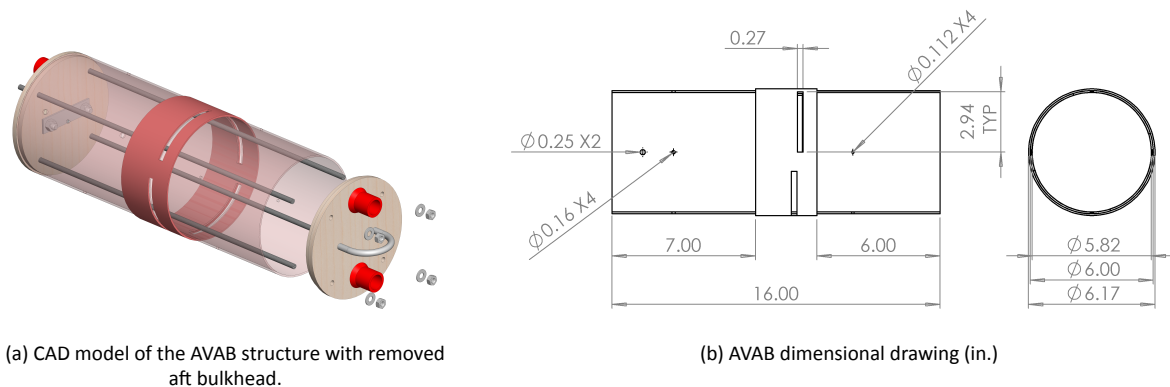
CAD model and dimensional drawing of the AVAB.
